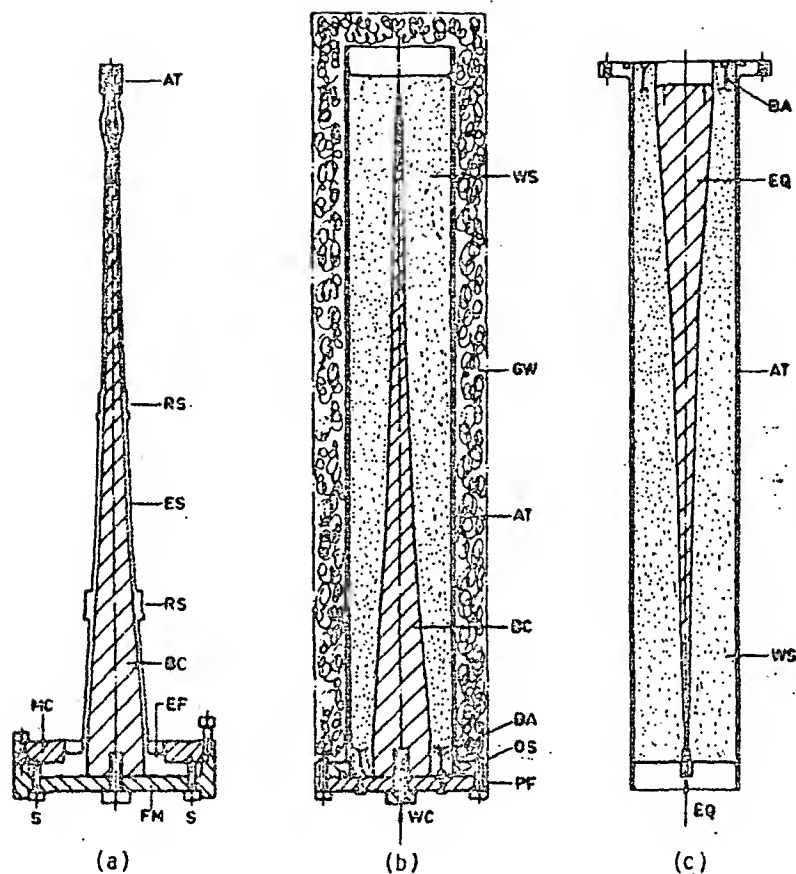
Manufacturing: (a) The glass fibre epoxy sleeve (ES) is wrapped around the brass cone (BC), with an aluminum tip (AT). An epoxy flange (EF) is cast in a covered (MC) flange mould (FM). Screws (S) may be used to form threaded holes. Supports for radiation shields (RS) are built up and machined after cure. (b) A wax/sand mixture (WS) is cast around the brass cone (BC) within an aluminum tube (AT), and insulated with glass wool (GW). Water cooling (WC) through an insulating flange (PF) determines the direction of congealing. Brass anchors (BA) hold the wax down. (c) Glass powder/epoxy mixture (EQ) is injected into the wax mould.
